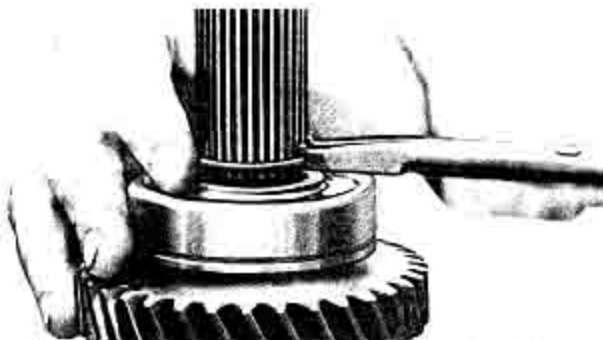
Removing or Installing Rear Bearing Snap Ring
